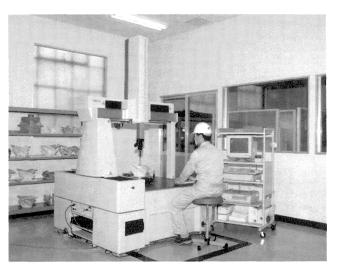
3-D Dimensional Measurement System for Hydraulic Parts.
